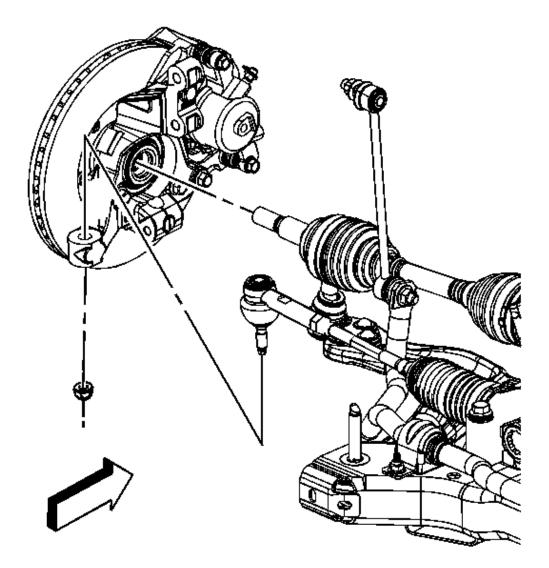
Ball Joint To Steering Knuckle Bolts And Nuts Courtesy of GENERAL MOTORS CORP.
